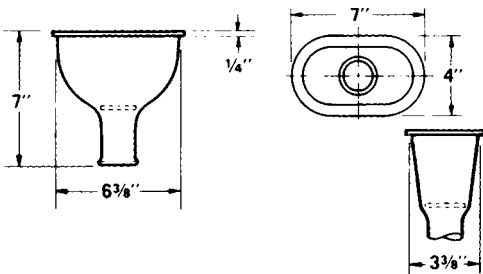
Beaded Outlet 3- by 6-in. Oval
